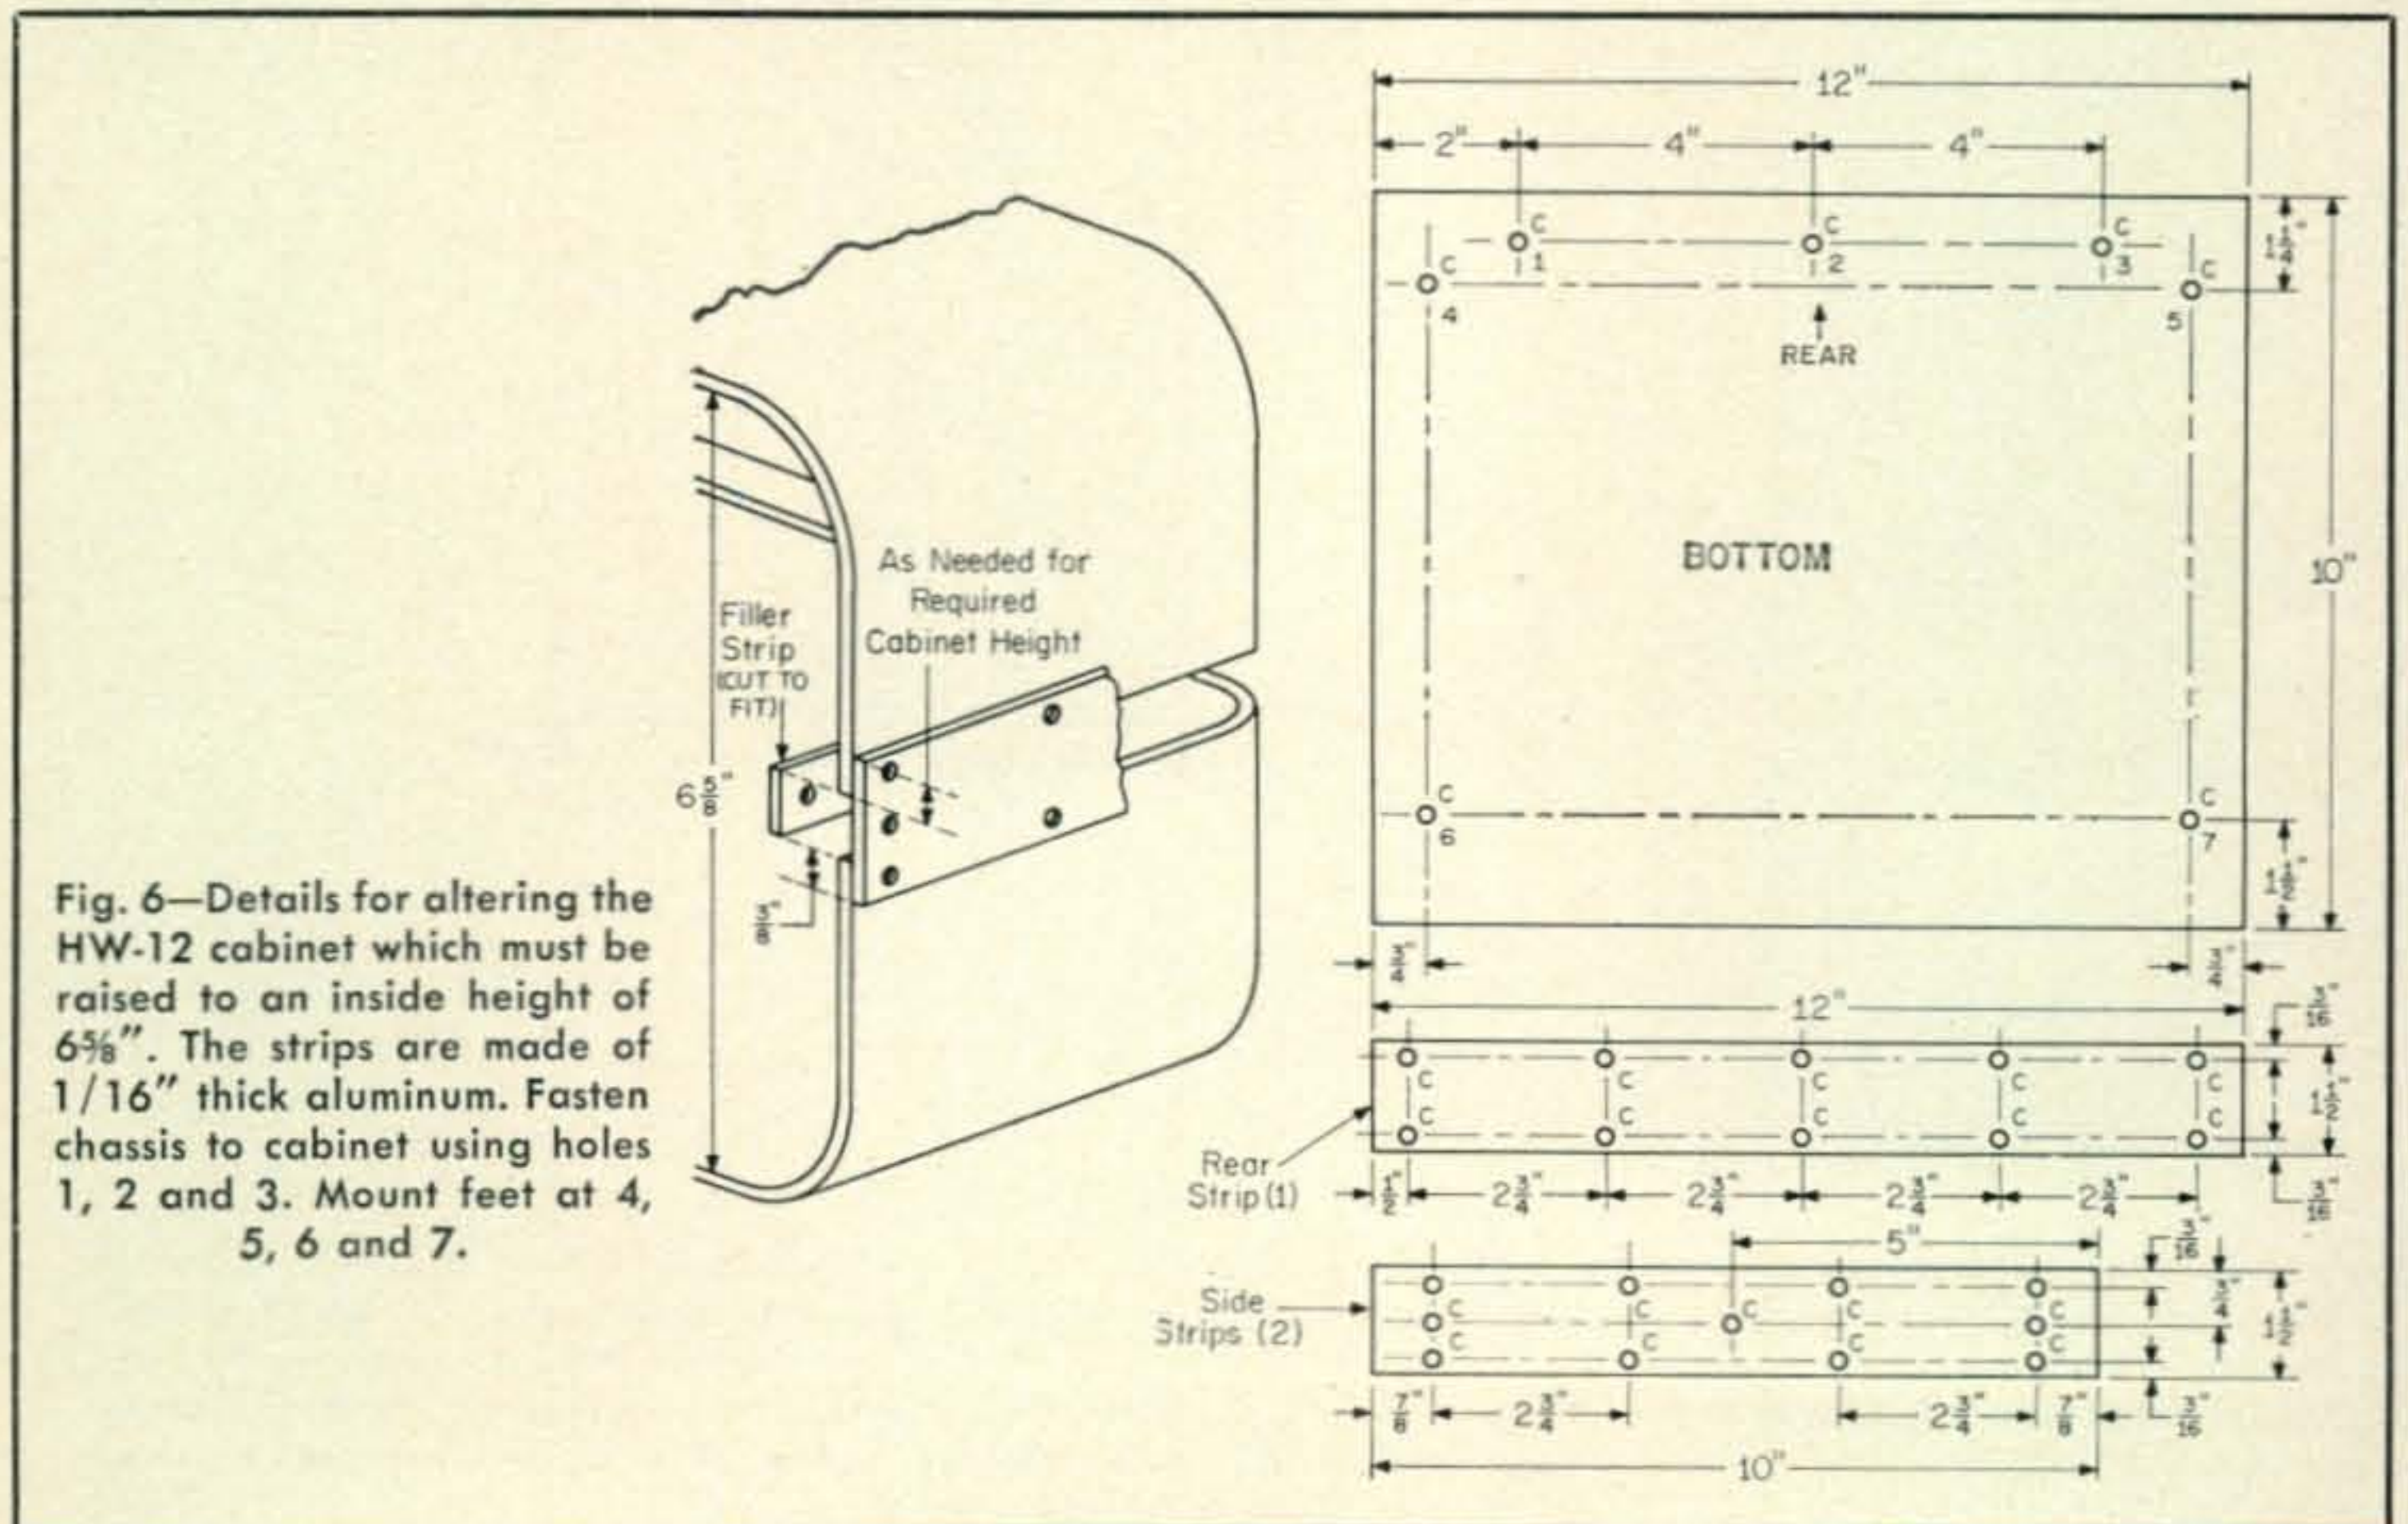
Details for altering the HW-12 cabinet which must be raised to an inside height of  $6\frac{5}{8}$ ". The strips are made of  $\frac{1}{16}$ " thick aluminum. Fasten chassis to cabinet using holes 1, 2 and 3. Mount feet at 4, 5, 6 and 7.
